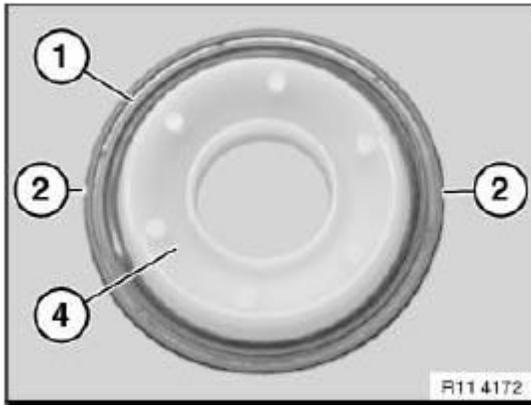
Identifying Radial Shaft Seal, Groove And Sleeve
